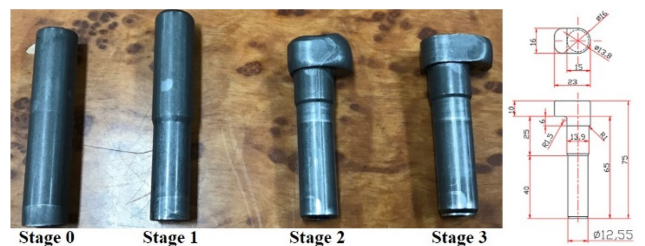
Eccentric bolt cold forging process and final product specifications by new process
